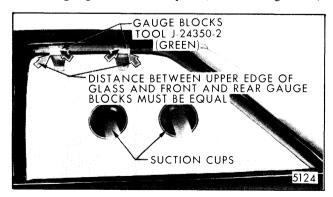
Front Door Window Adjustment (Rotated "Cocked" Glass in Body Opening)
